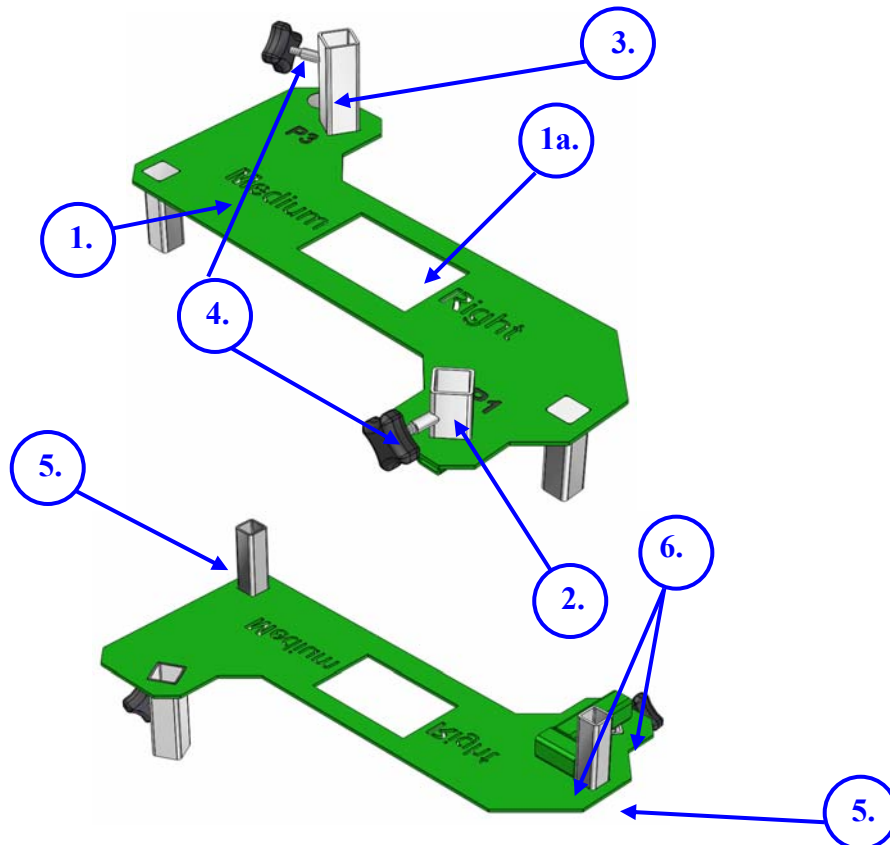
Structure of the S size orthosis holder plate. (Top and bottom views)
